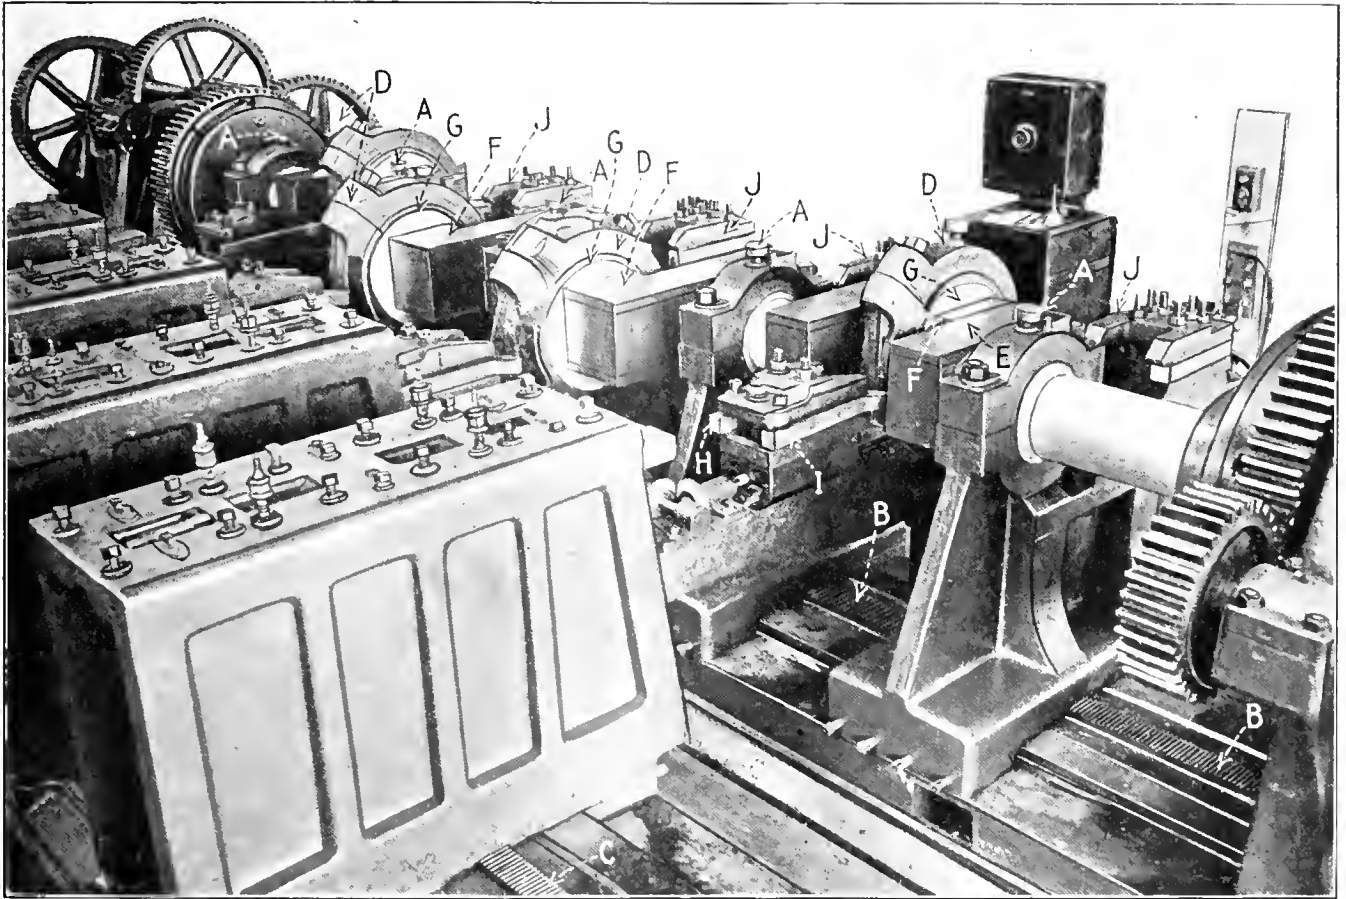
THE MACHINE WITH A LARGE-CRANKSHAFT IN PLACE
